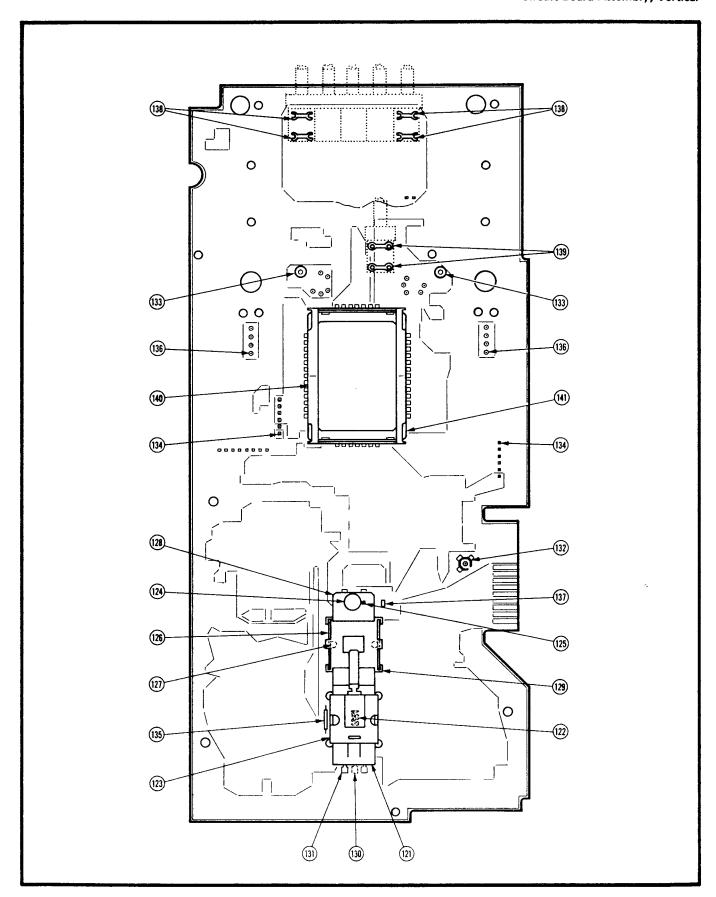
Circuit Board Assembly, Vertical (Sheet 4 of 4).
